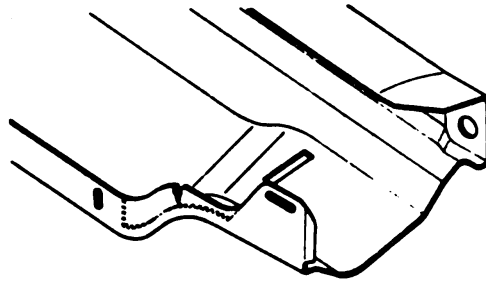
1978 Eldorado rear bumper crack and trimline revisions
